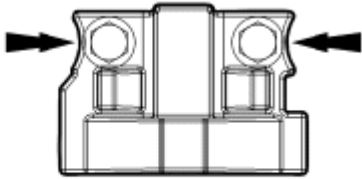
Identifying Cam Phaser Locking Tool (303-1046)
